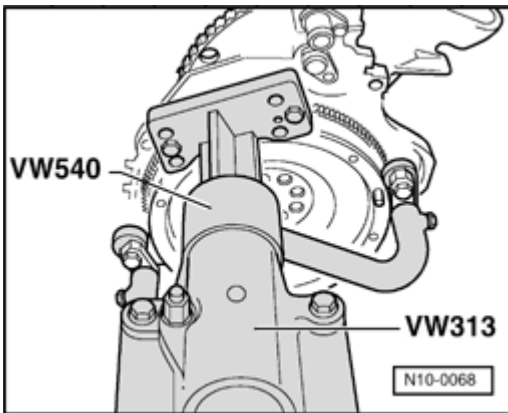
Identifying Engine Fastened Using Holding Fixture VW 540 & Holding Fixture VW 313
